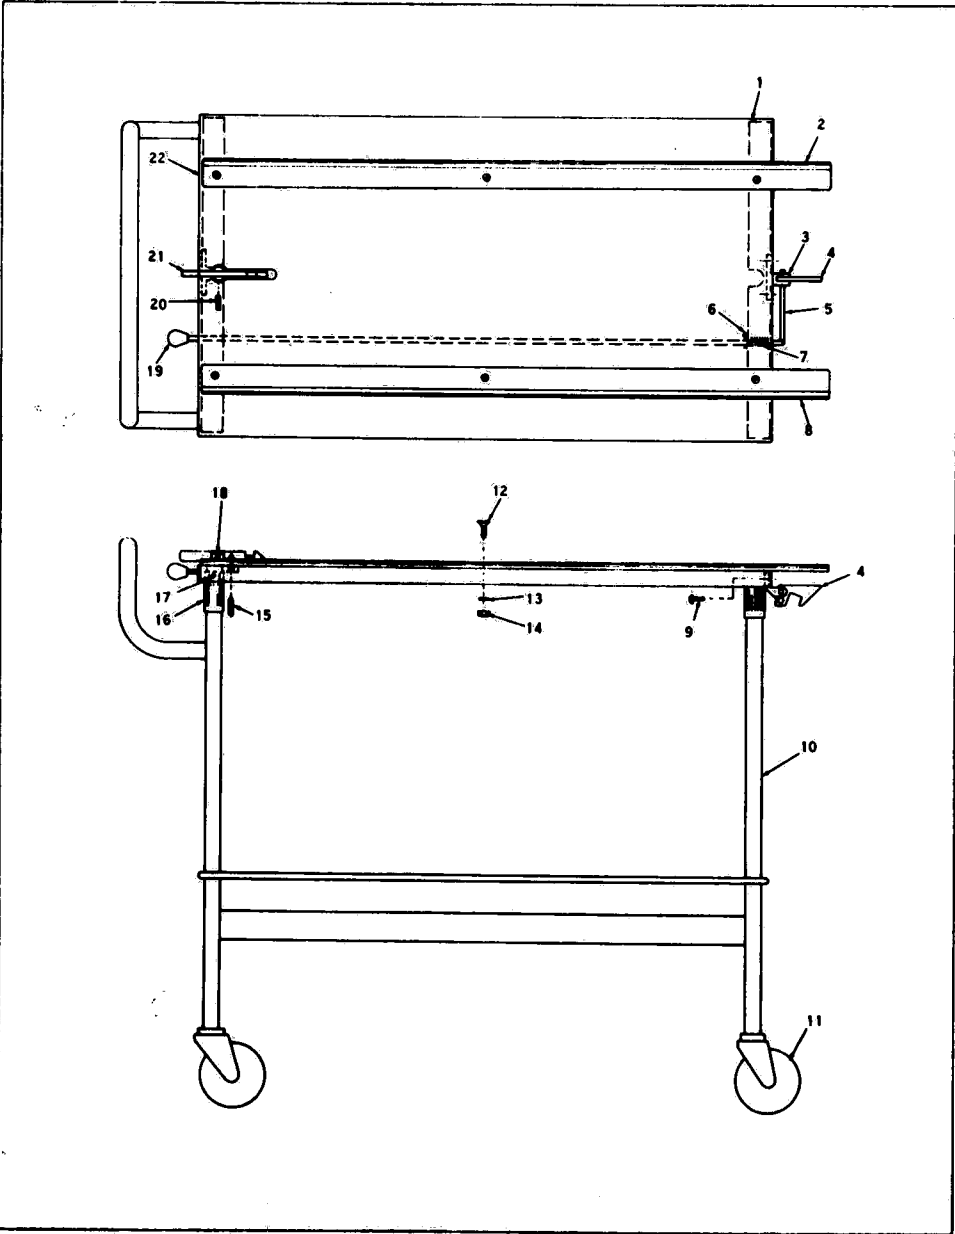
TRANSFER CARRIAGE ASSEMBLY.
